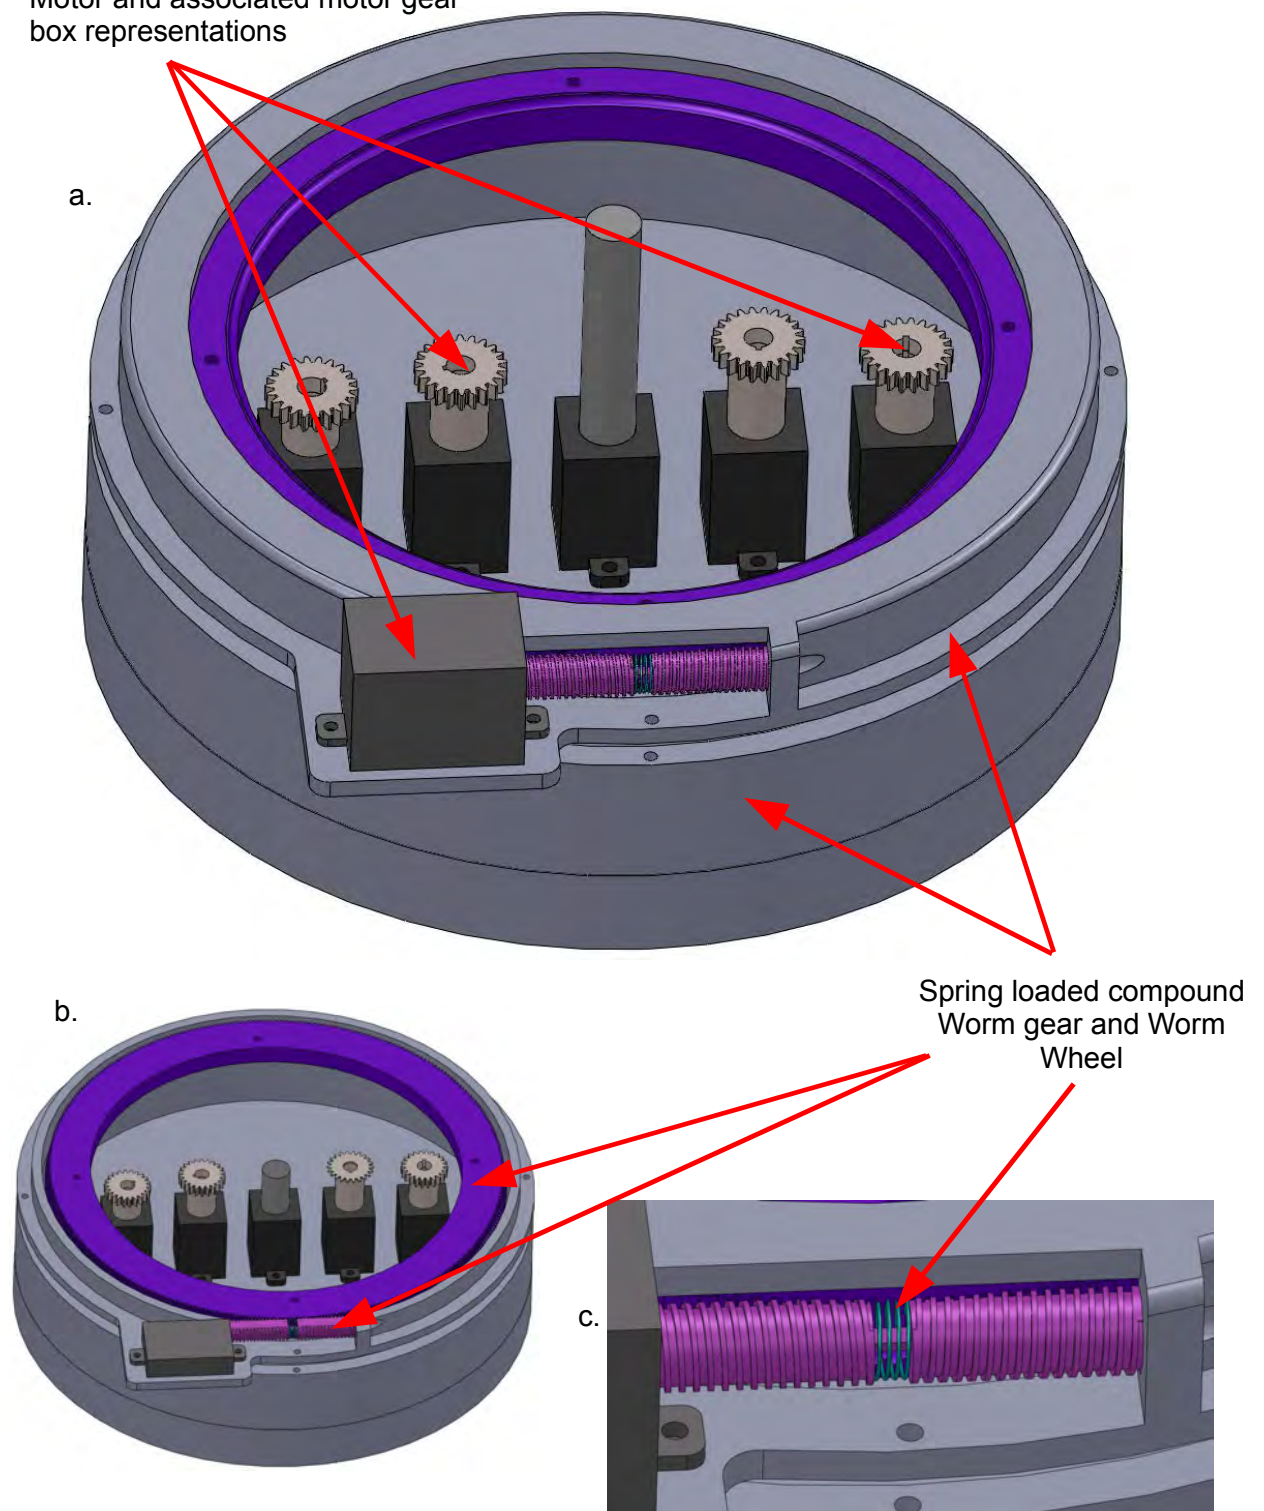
Motor units illustrating their position and arrangement on a fixed base
